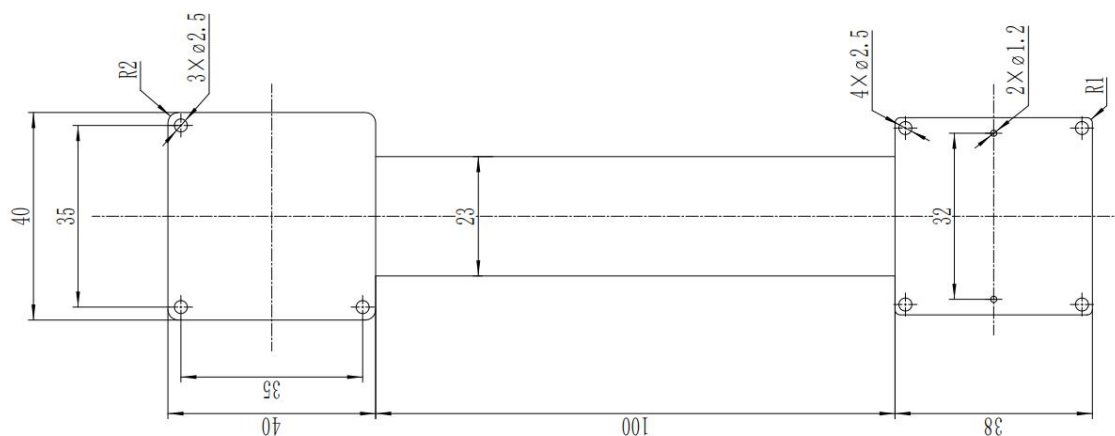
Dimensions of OEM1 circuit board (mm)
